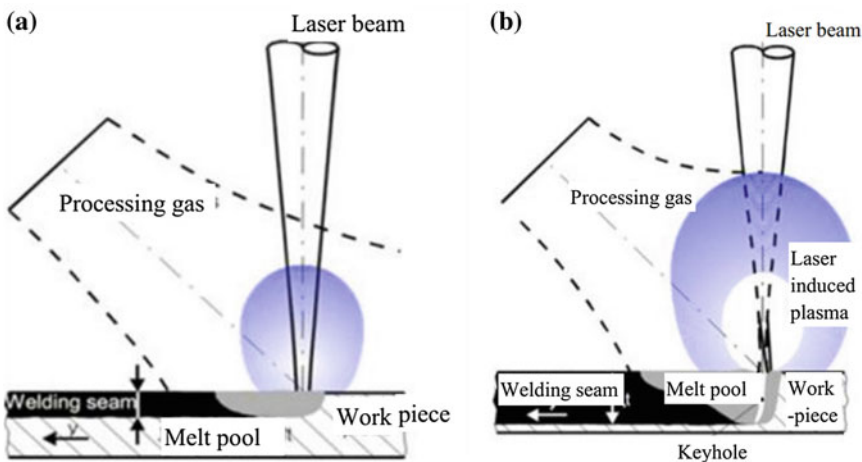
a Conduction, and b Keyhole mode of Laser beam welding process
